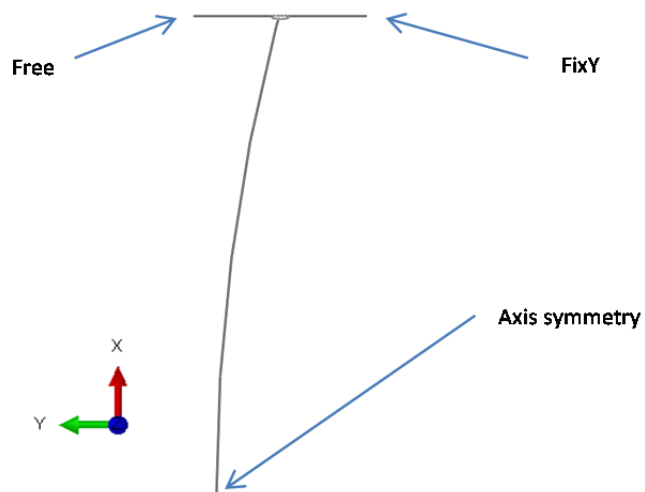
Axi-symmetric cross-section of the welded area.
